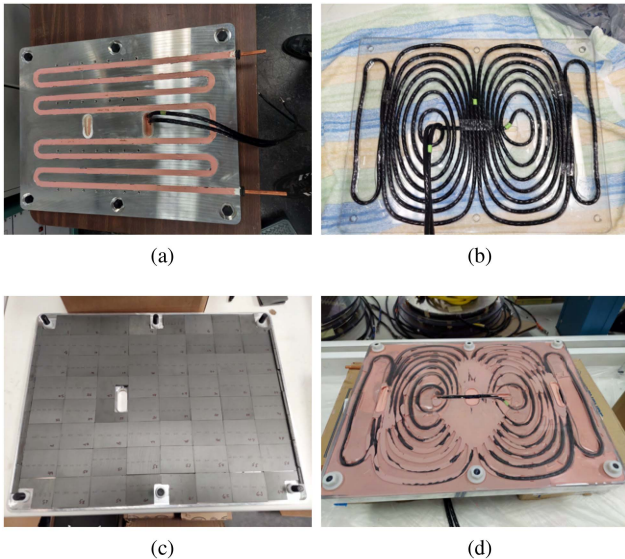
Construction of the Gen. 2 120 kW coil assemblies. (a) Bent tubing pressed and bonded into the channels in the aluminum enclosure and covered with encapsulant. (b) Coil former with routed wire taped in place. (c) Ferrite layout and numbering of one of the Gen. 2 coil assemblies. (d) Frontside of a cured Gen. 2 coil.
